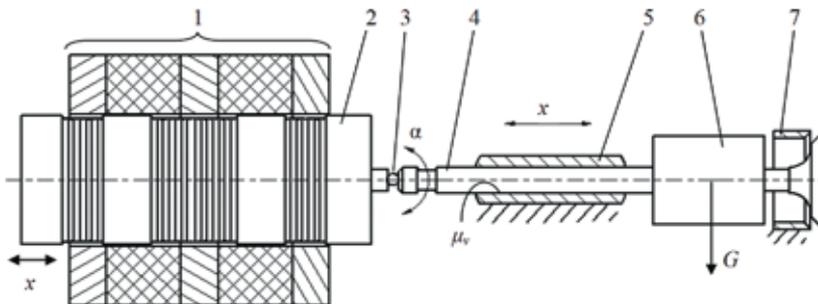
The model of the assembly consisted of movable coil the drive and valve bearing in its guide and loaded by additional weight; 1 - immovable part of the drive, 2 - movable coil, 3 - spherical joint, 4 - valve, 5 - guide, 6 - additional weight, 7 - seat insert
